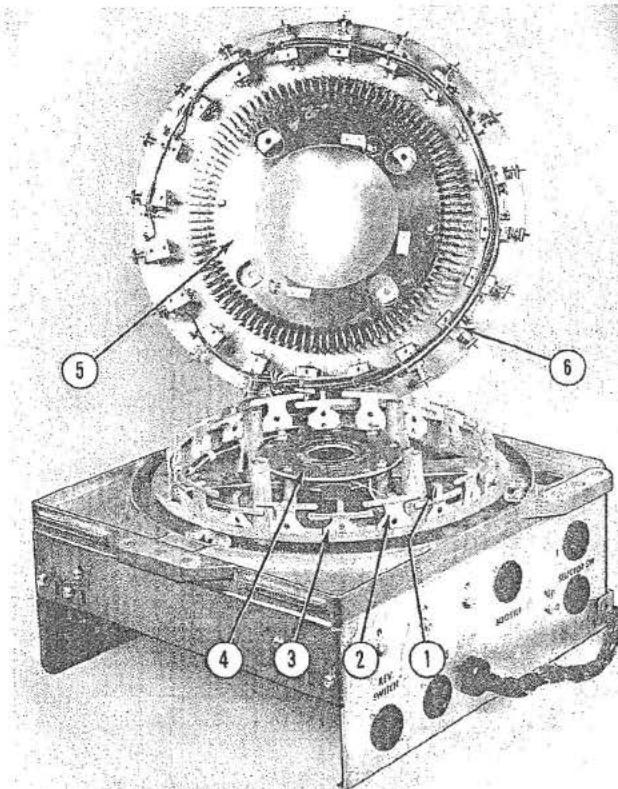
ELECTRIC SELECTOR ASSEMBLY, 2410
